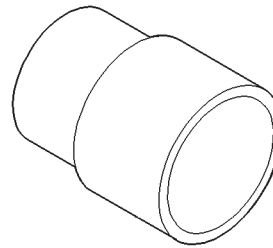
Crankshaft Sprocket Installer Tool MD990799
